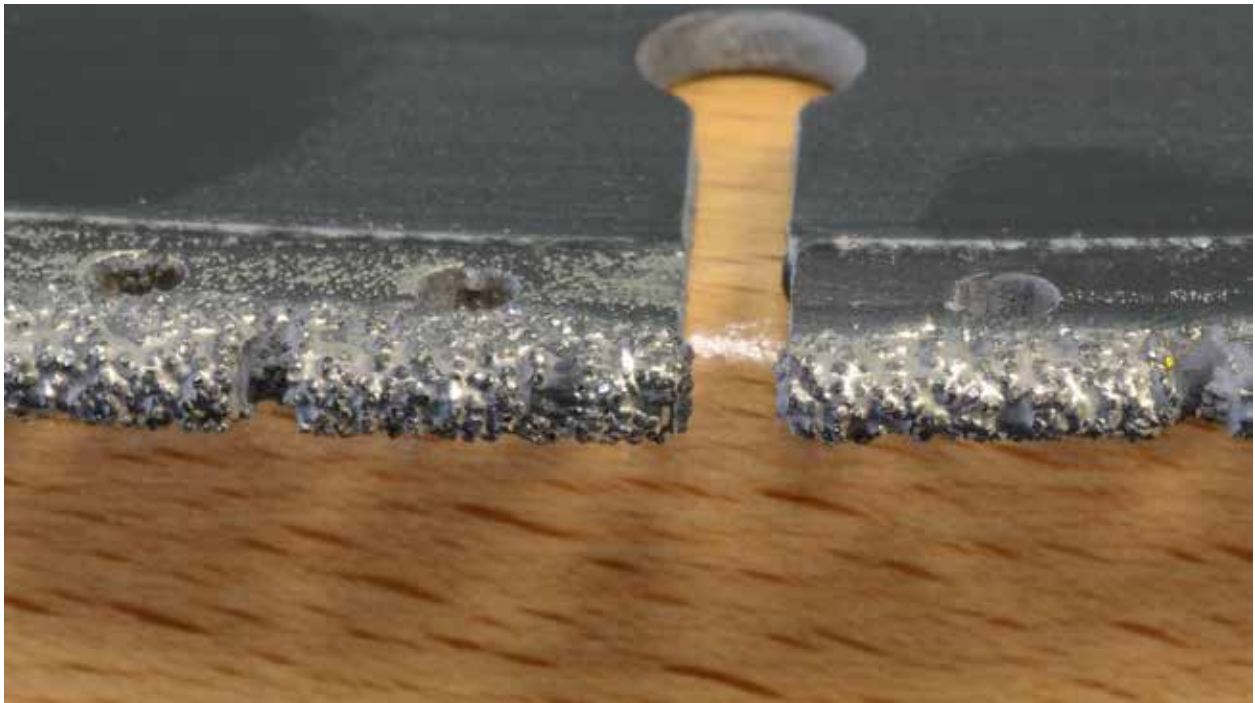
Diamond Saw Blade, CF16, Dry Cuts
